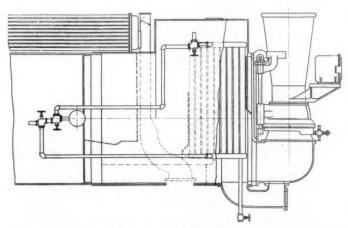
Modified Front End, Equipped with Induced Draft Fan and Feed-Water Heater
